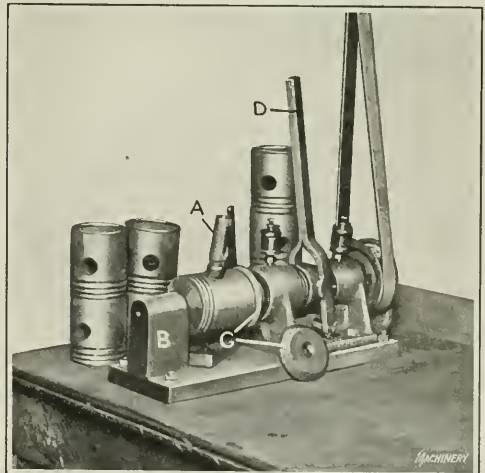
Special Machine designed and built for Use in grinding the Center Bearing in the Open End of the Piston
